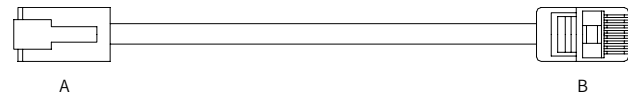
Outline drawing of the cable for parallel communication of multiple servo drives (S6-L-T04)
